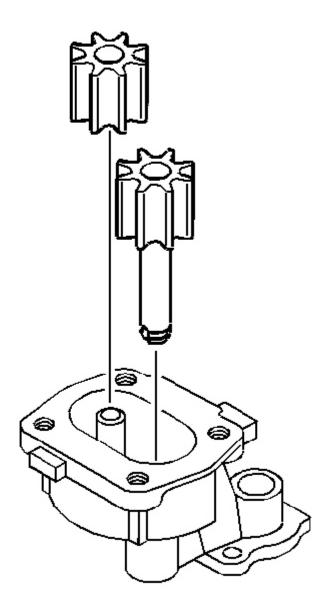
View Of Oil Pump Drive Gear & Driven Gear Courtesy of GENERAL MOTORS CORP.
